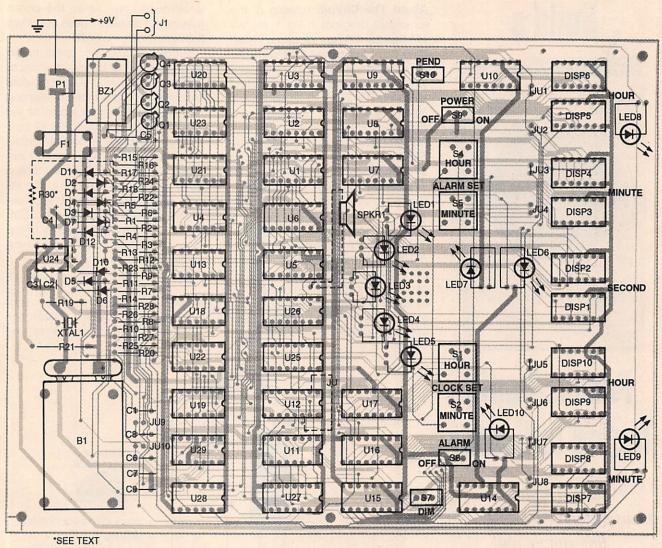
Use this parts-placement diagram when mounting the parts to the PC board. Pay careful attention to polarized components. Note that R30 and a jumper mount on the back of the board.
